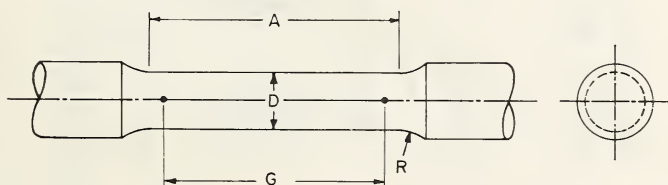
Standard 0.500-in. (12.7-mm) Round Tension Test Specimen with 2-in. (50.8-mm) Gage Length.
